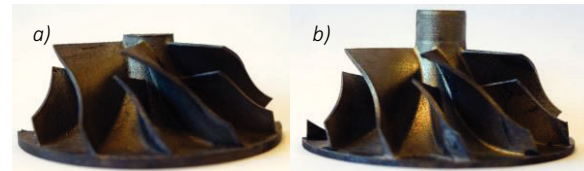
Impeller produced by SLM a) LayerWise; b) Renishaw.
